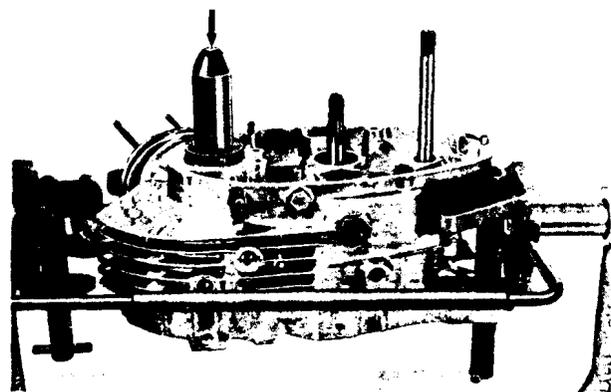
Inserting the crankshaft bearing at the left-hand side
